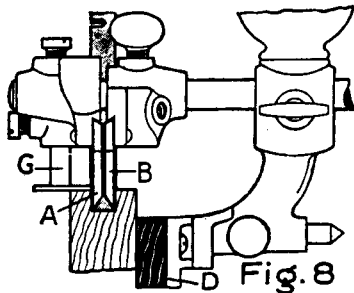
MATCHING (Groove)—Use the one-quarter inch plow cutter. Fence (D) regulates the distance of groove from face of board and Gauge (G) the depth of groove. No Spurs are necessary.
